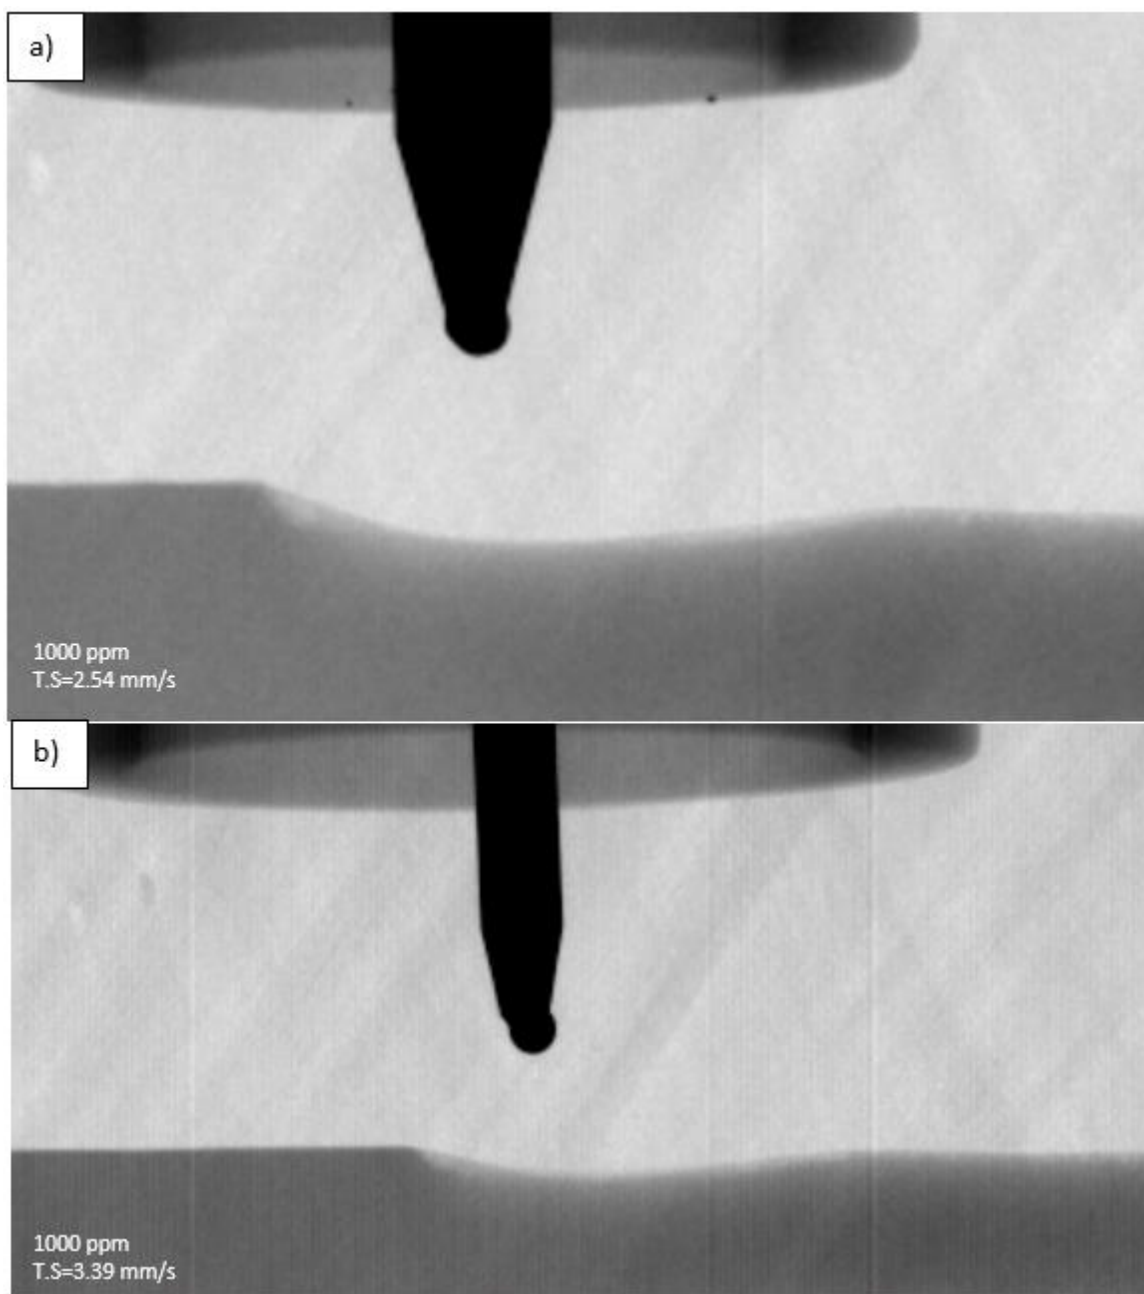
Alloy 4047 welded using 1000 ppm of shielding gas hydrogen at a) 2.54 mm/s and b) 3.39 mm/s.
